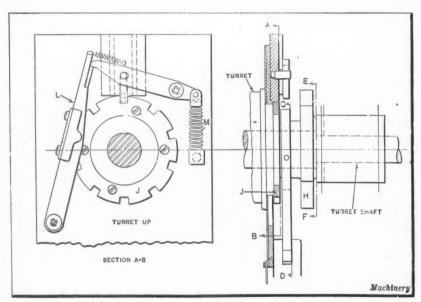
Mechanism for indexing and traversing the Turret of the Counterboring Machine
